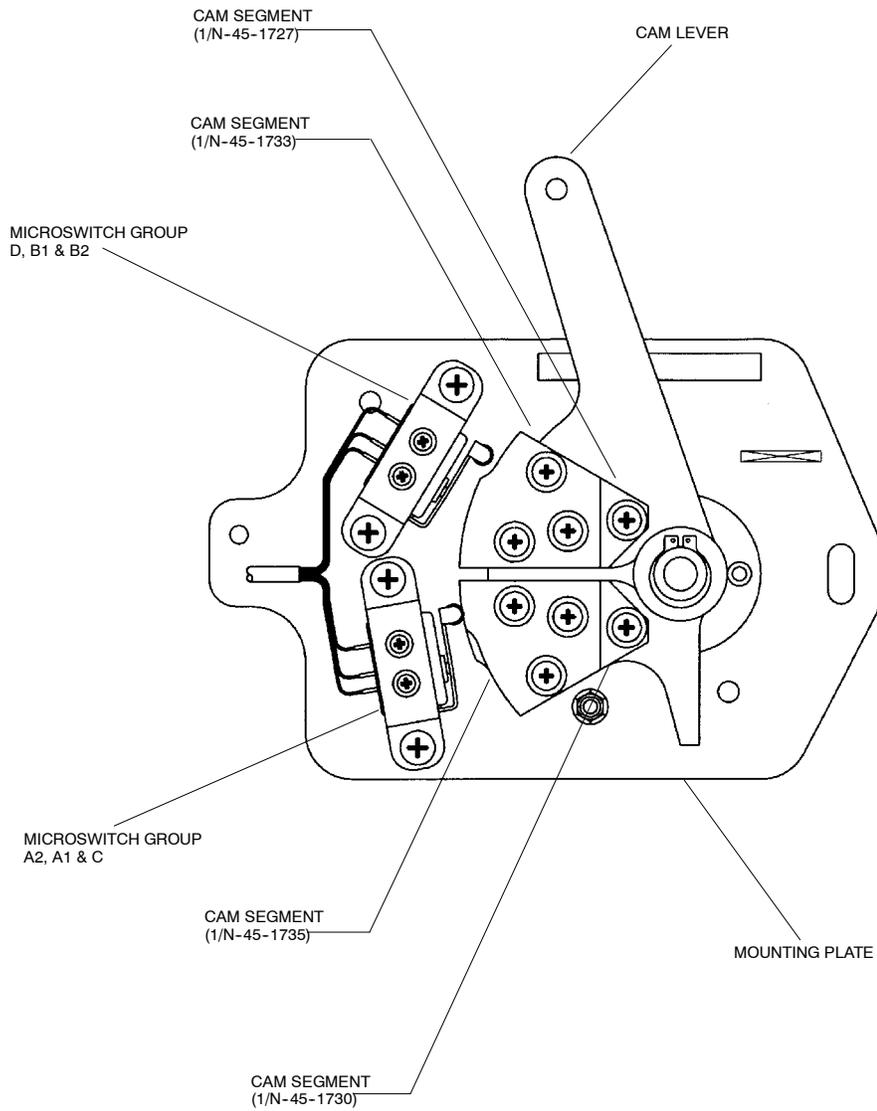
Cam/Microswitch Assembly (Mod N874)
